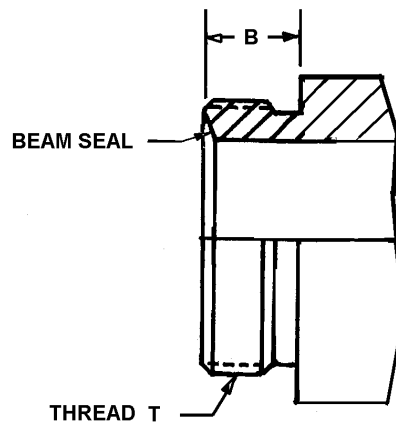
Types Q, X, Y, Z fitting end standards, coupling half, aircraft mounting.
